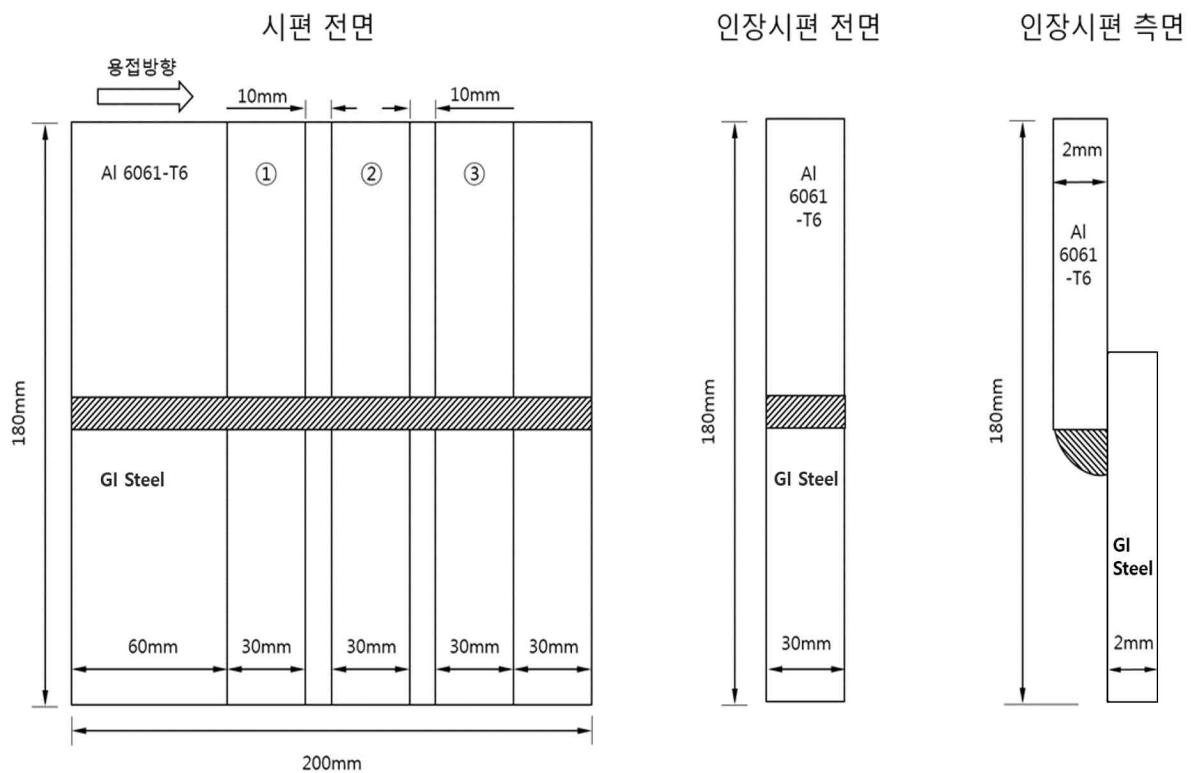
Schematic of Tensile-Shear Test Specimen
